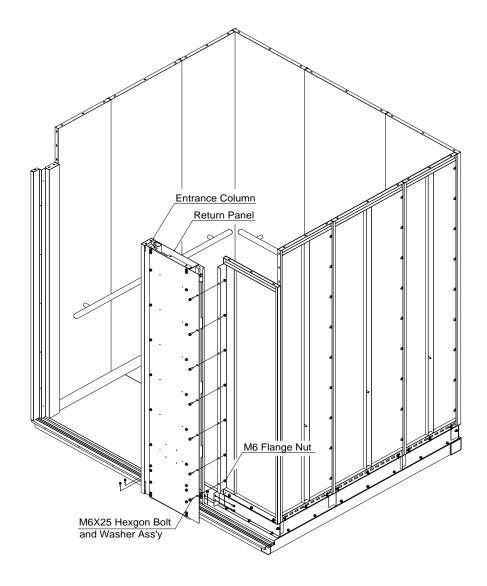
E. RETURN PANEL ASSEMBLY
